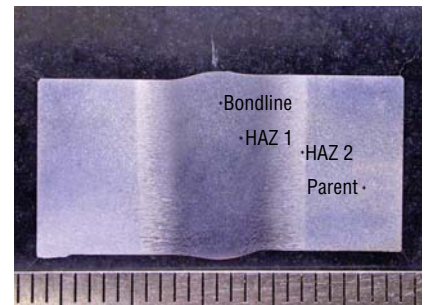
Spinduction™ welds look completely different from any known friction, inertia or induction pressure welds – macroscopically and microscopically.
